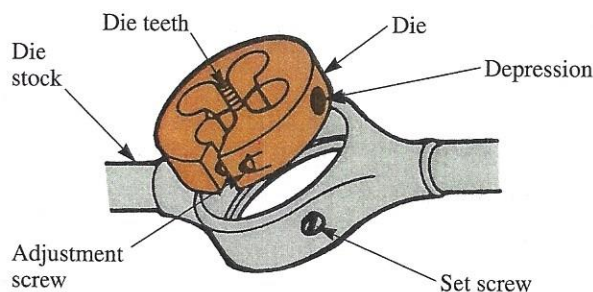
Threading dies are used to cut external threads. The die is inserted in a wrench called a die-stock. The conical teeth of the die should be started on the rod or bolt.
